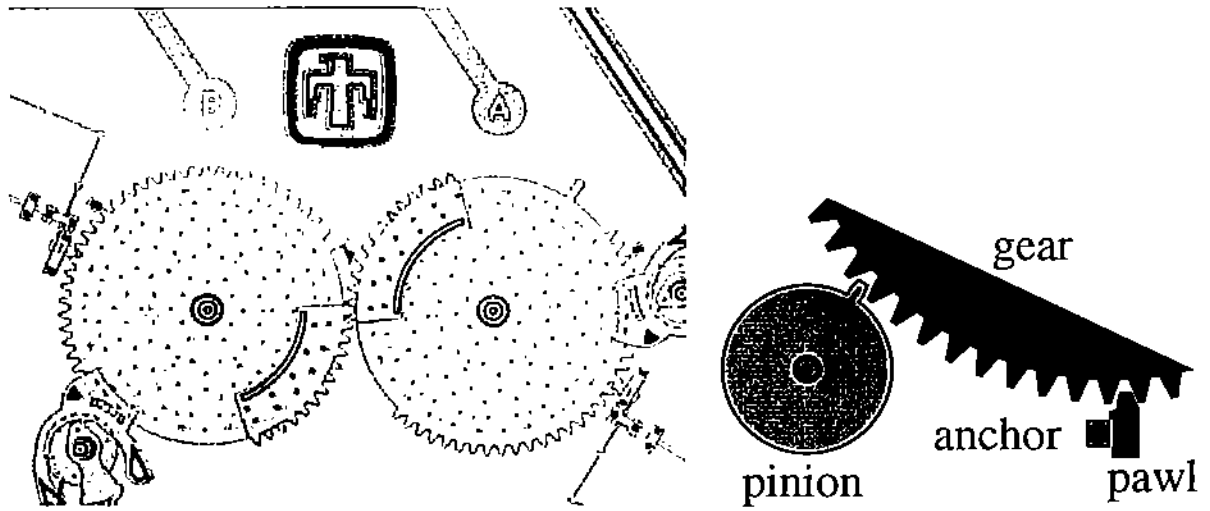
(a) Photograph of the micro-mechanical discriminator mechanism. The real size is about 200 microns; (b) detail of the indexing assembly CAD model.
